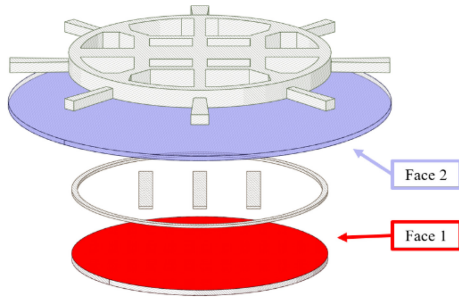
Spring connection Face 1, Face 2 pair for Model 1
